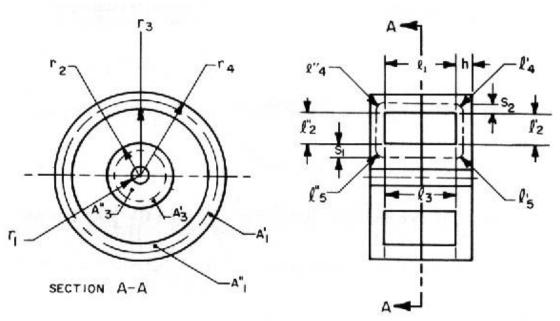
POT CORE SET DIVIDED INTO 5 SECTIONS
